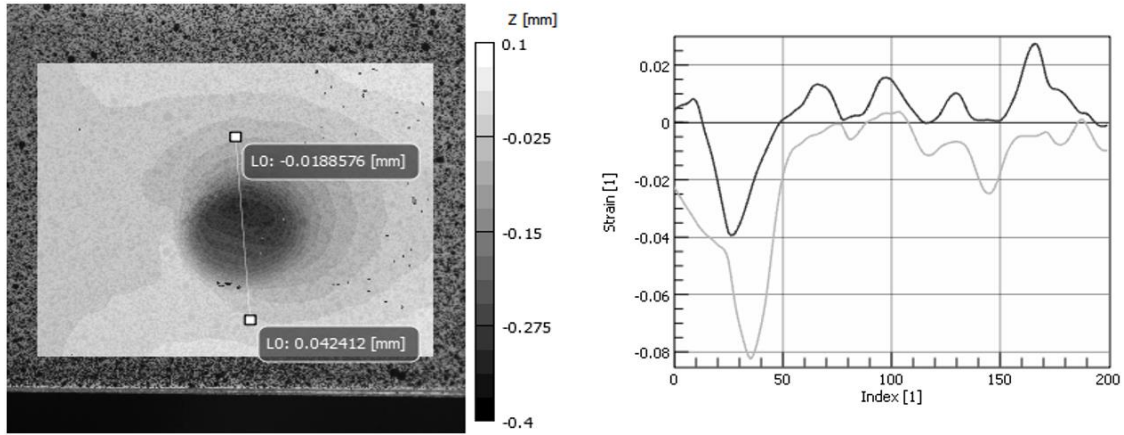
Out-of-plane position (left) and principal strain along the line slice (right) for the first weld of a 1.2 mm 400°C tailored flange specimen
